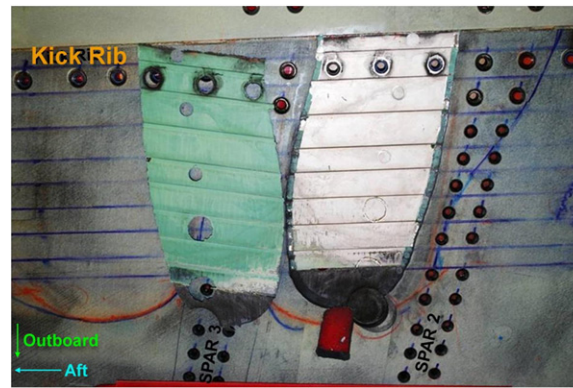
The excised disbond. Note the lack of adhesive residue on one of the fracture surfaces, as indicated by the white color. Image from Mueller, E.M., Starnes, S., Strickland, N., Kenny, P., Williams, C., 2016. The detection, inspection, and failure analysis of a composite wing skin defect on a tactical aircraft. *Compos. Struct.* 145, 186–193. Available at: <https://doi.org/10.1016/j.compstruct.2016.02.046>. Reproduced with permission from Elsevier.
